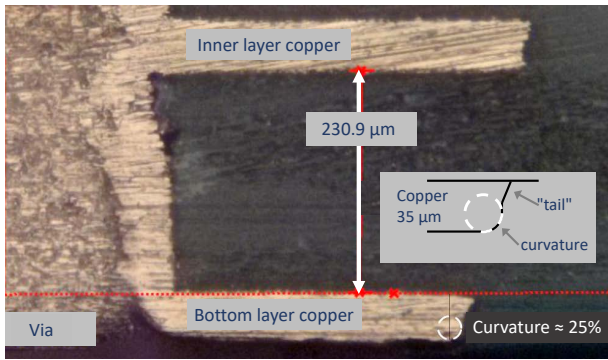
Cross-section of a PCB production batch showing a part of a via, the bottom copper layer and an inner layer.
